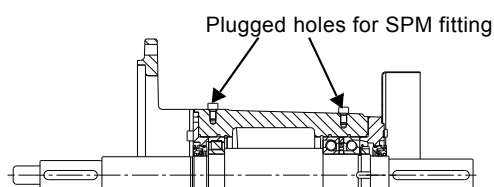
Bearing bracket for retrofitting of SPM measuring equipment
